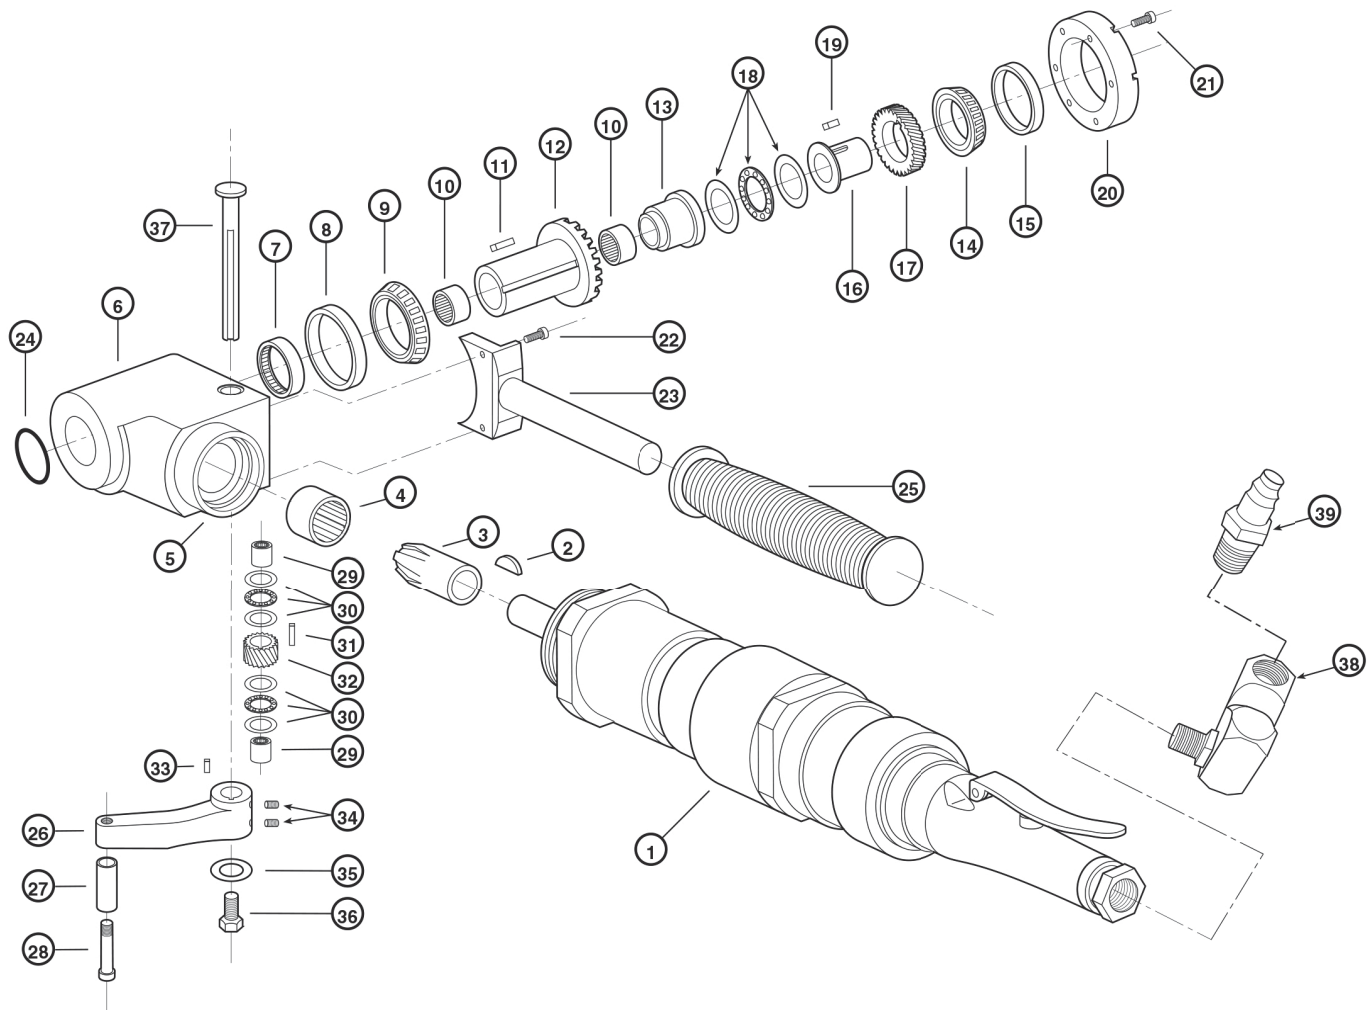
BG44 BOILER GUN - LOW VELOCITY, CRANK FEED ASSEMBLY (P/N BG44LVCR)
